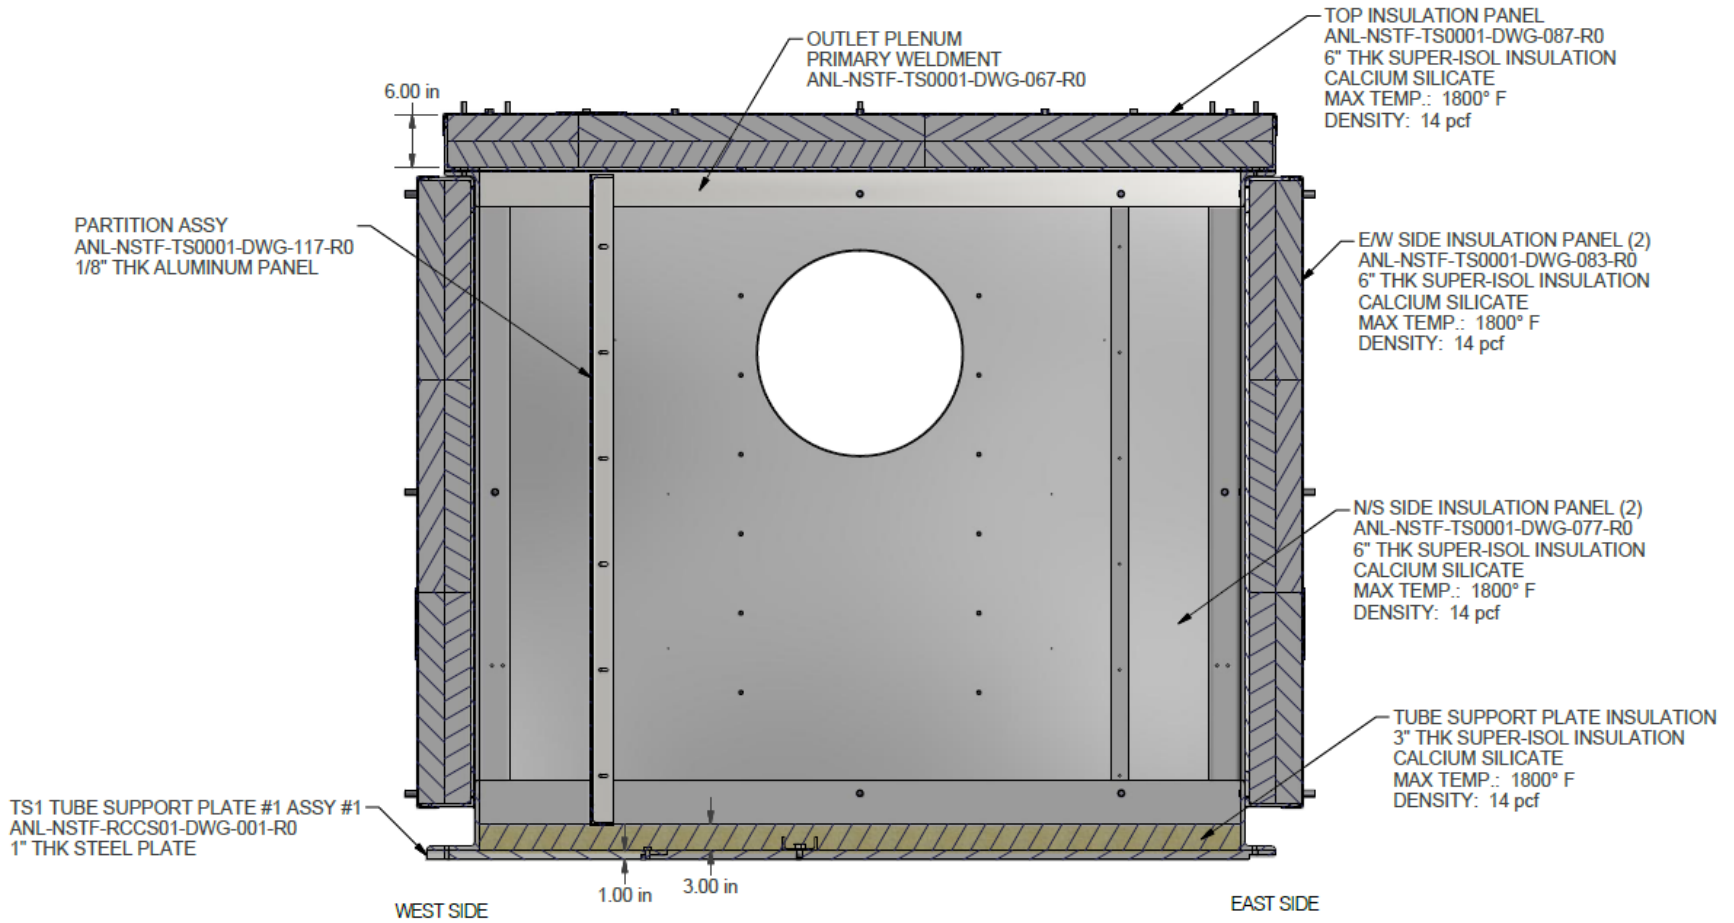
Cross section (east/west) of outlet plenum and surrounding insulation panels
